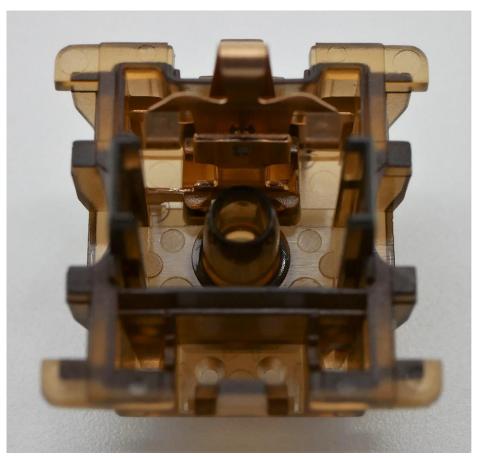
Gateron Root Beer Float bottom housing internal design showing mold ejector circles and centered bump at the bottom of the slider rails for dampening bottom out.
